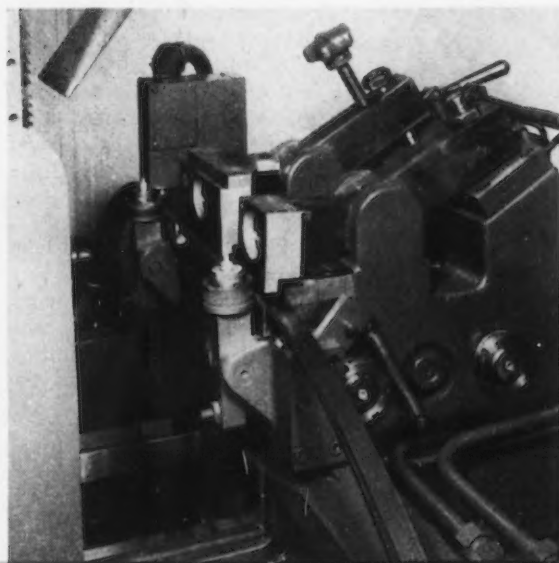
This sliding fixture positions five band saw blades for broaching of the teeth. The clamp in the foreground feeds the blades as the fixture retracts from cutting position.
